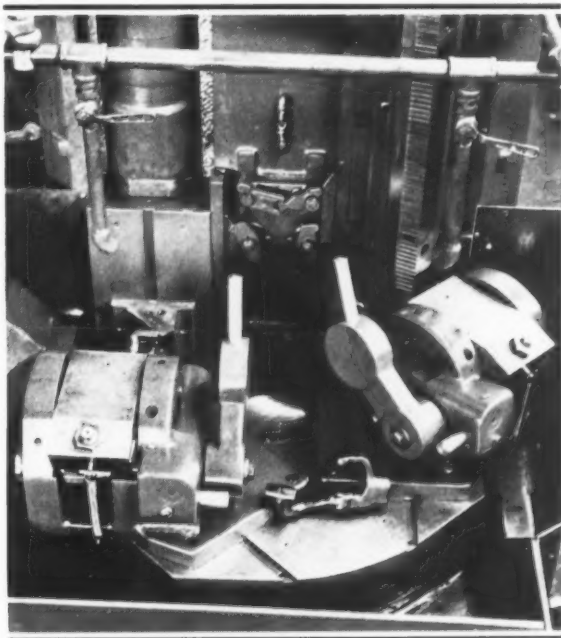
Machine Similar to One Shown in Fig. 1, but of Larger Size, Performing a Second Broaching Operation
